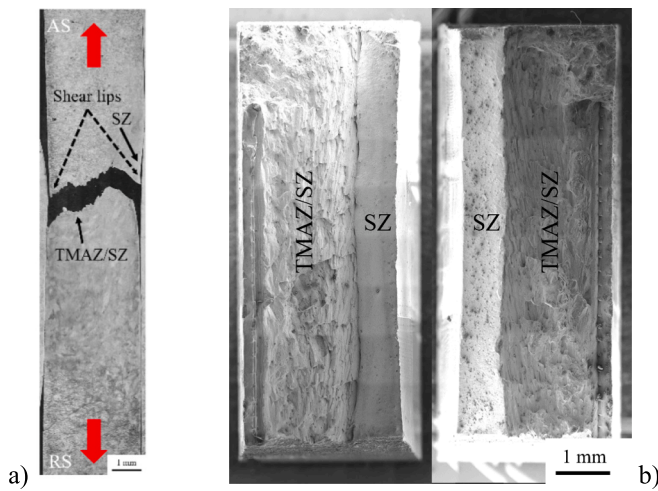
Macroscopic view of the fractured FSW joints after heat treatment: a) welded tensile samples (the red arrows identify the tensile load during the test) and b) fracture surfaces. (For interpretation of the references to color in this figure legend, the reader is referred to the web version of this article.)
